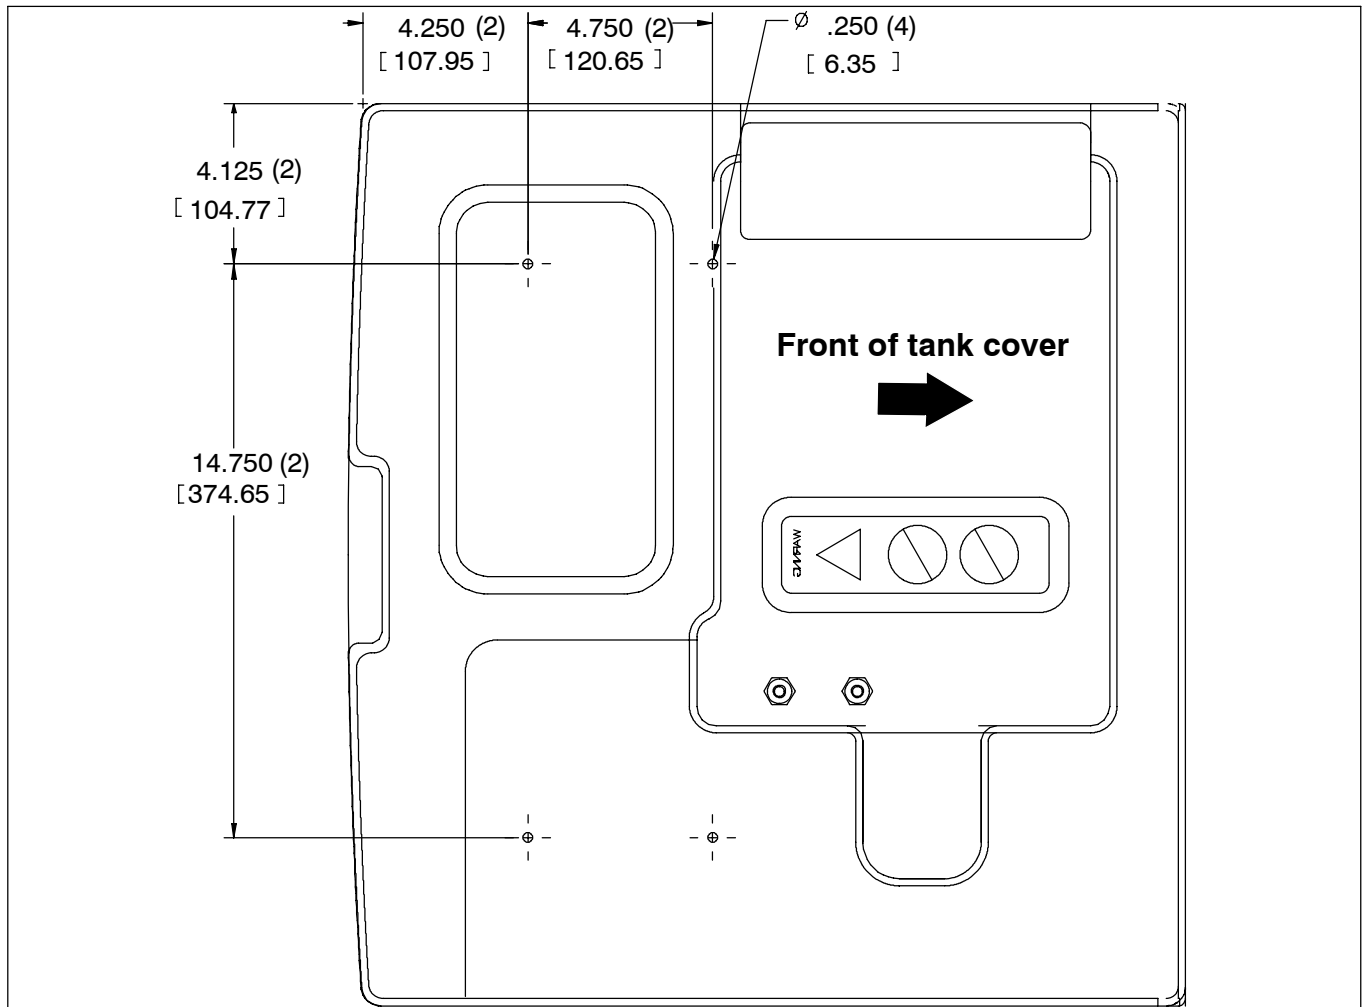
Power Wand Bag Mounting Hole Dimensions
